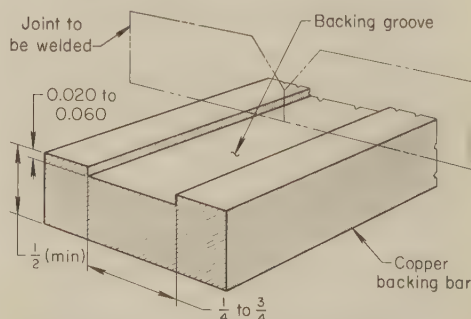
Recommended groove dimensions for copper backing bars used in submerged-arc welding of stainless steel
